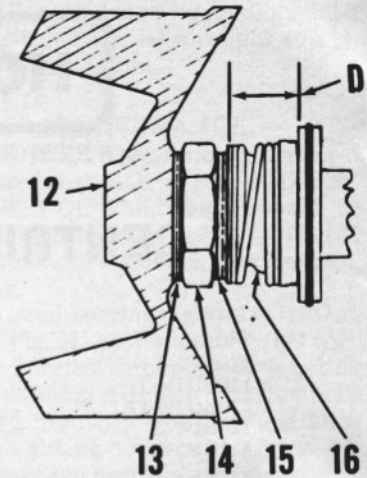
Seal seat to head distance (D) on models 45TP3-1, 117TP3-1 and 120TP3-1 should be 0.865-0.885 inch. Refer to text.
